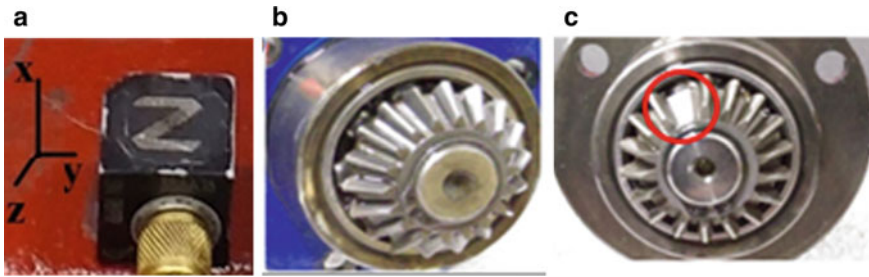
a Zoomed view of the accelerometer, b healthy bevel gear and c missing tooth bevel gear
